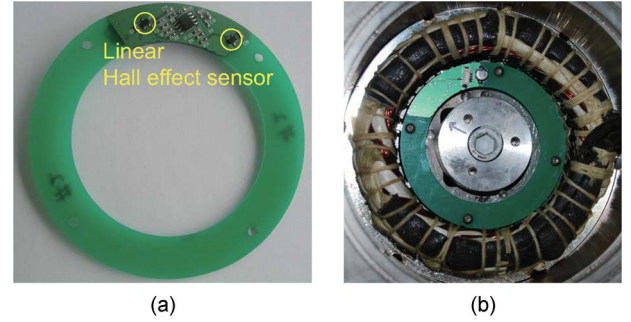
Hall sensor board and its assembled view: (a) Hall sensor board and (b) assembled view at the end of the rotor.
